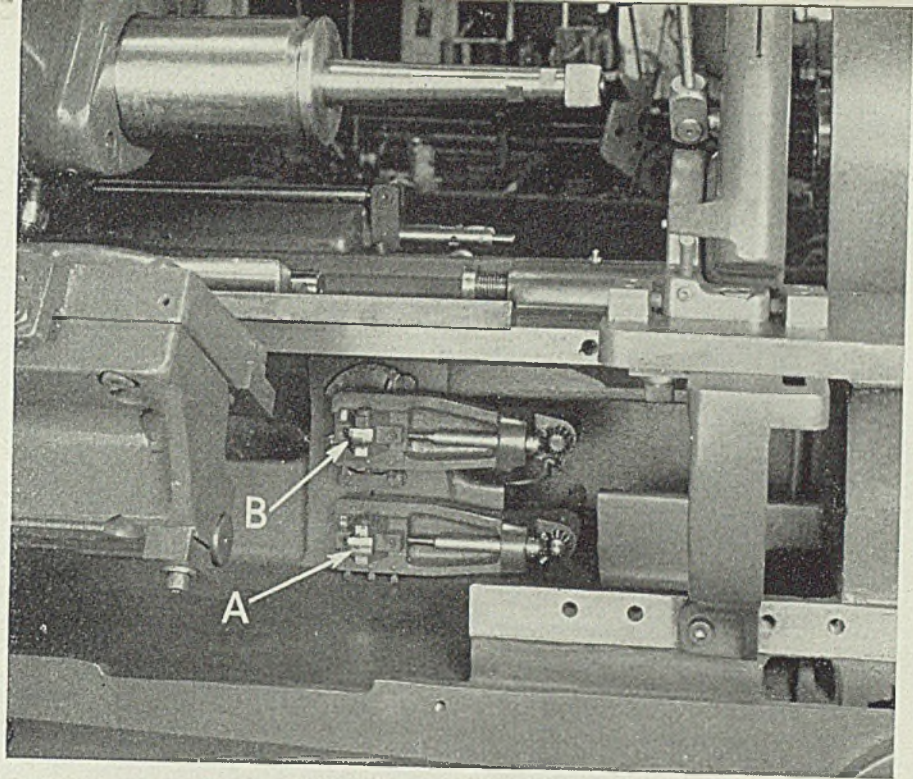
Rear view of Bryant grinder showing bearing shoes and their longitudinal adjustment
